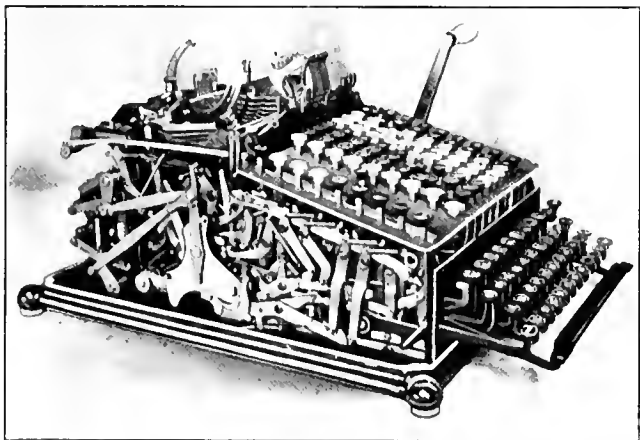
Front and Left-hand View of the Machine with the Case Removed
